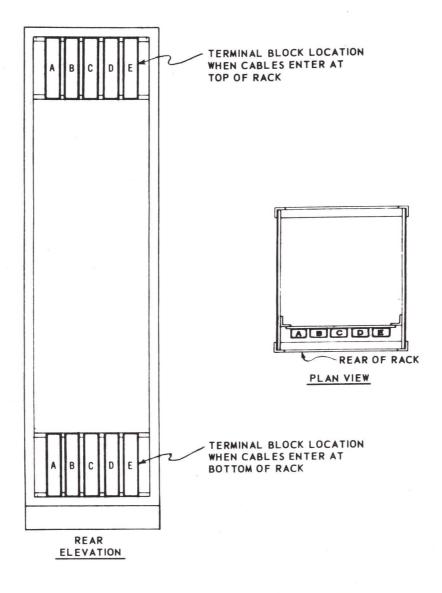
Standard location of terminal blocks in CBS equipment rack assemblies - rack is shown viewed from rear.
